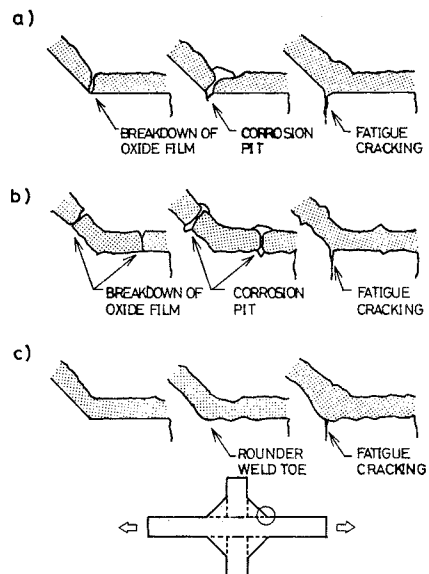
Possible change of fillet weld toe profiles due to weathering.
